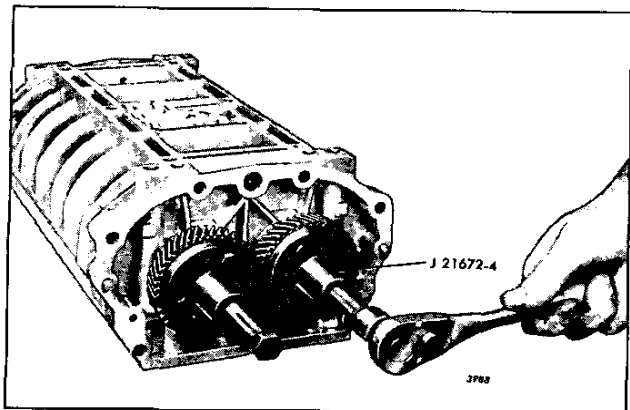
Removing Rotor Gears Using Tool J 21672-4
